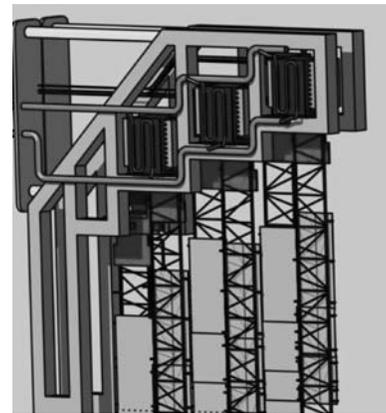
Detail of STS system integration design, with mechanical support, front-end electronics and cooling.
